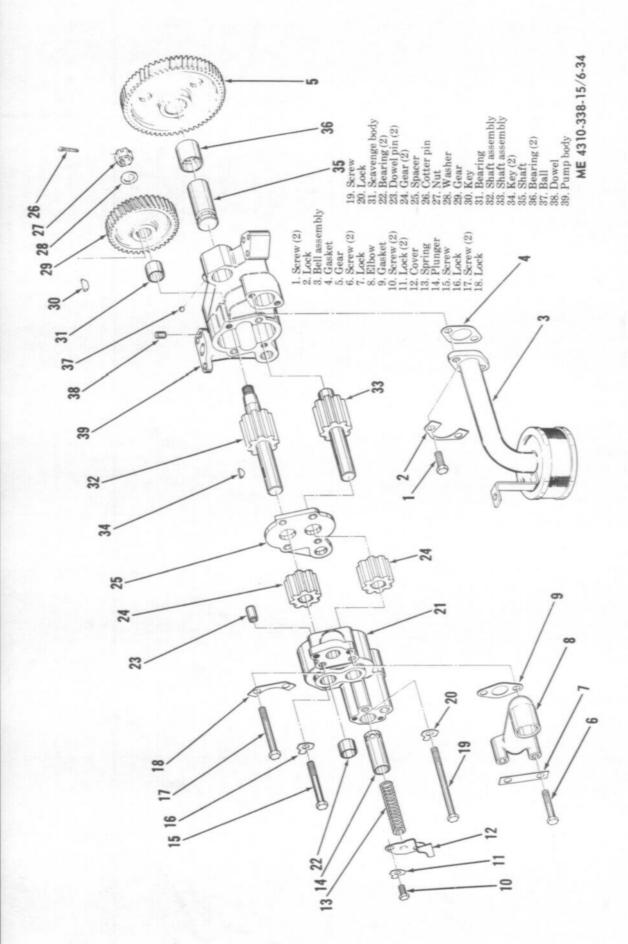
Oil pump assembly; disassembly and reassembly.
